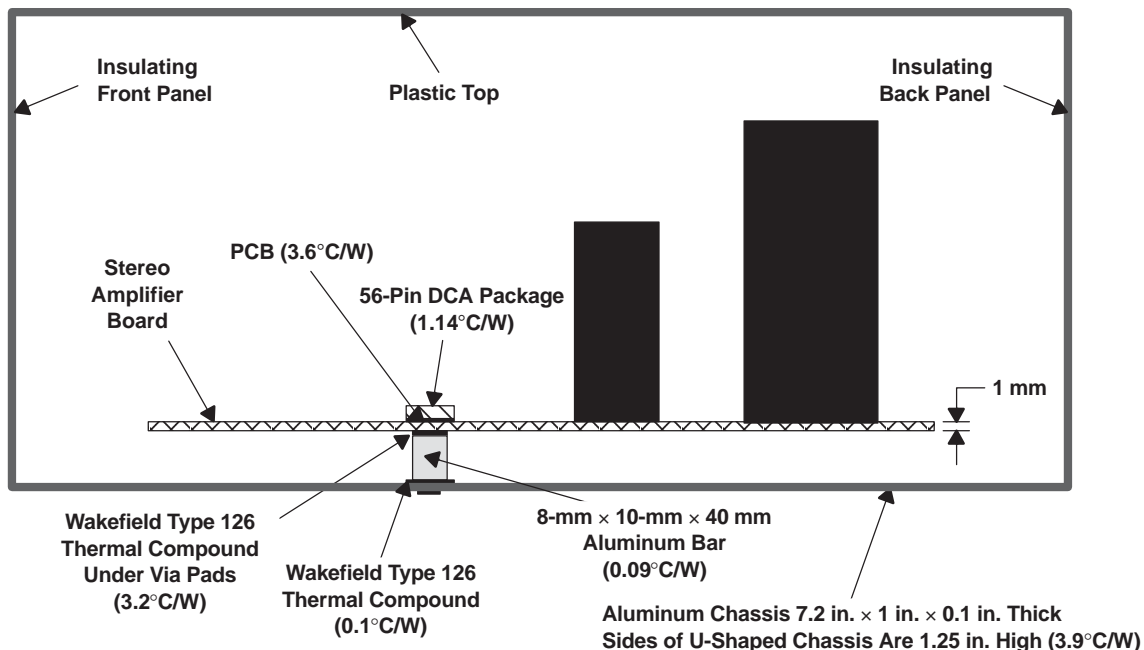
56-Pin DCA Package Cross-Sectional View (Side)
